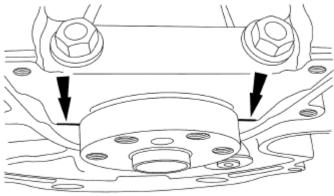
Locating Main Bearing Beam Lubrication Area Courtesy of FORD MOTOR CO.
